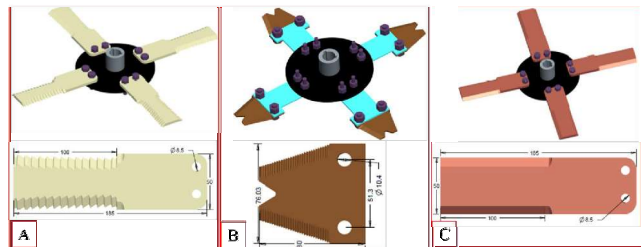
Placement and dimensions of different blades A) SMS Serrated, B) Cutter bar and C) SMS Plain blade
